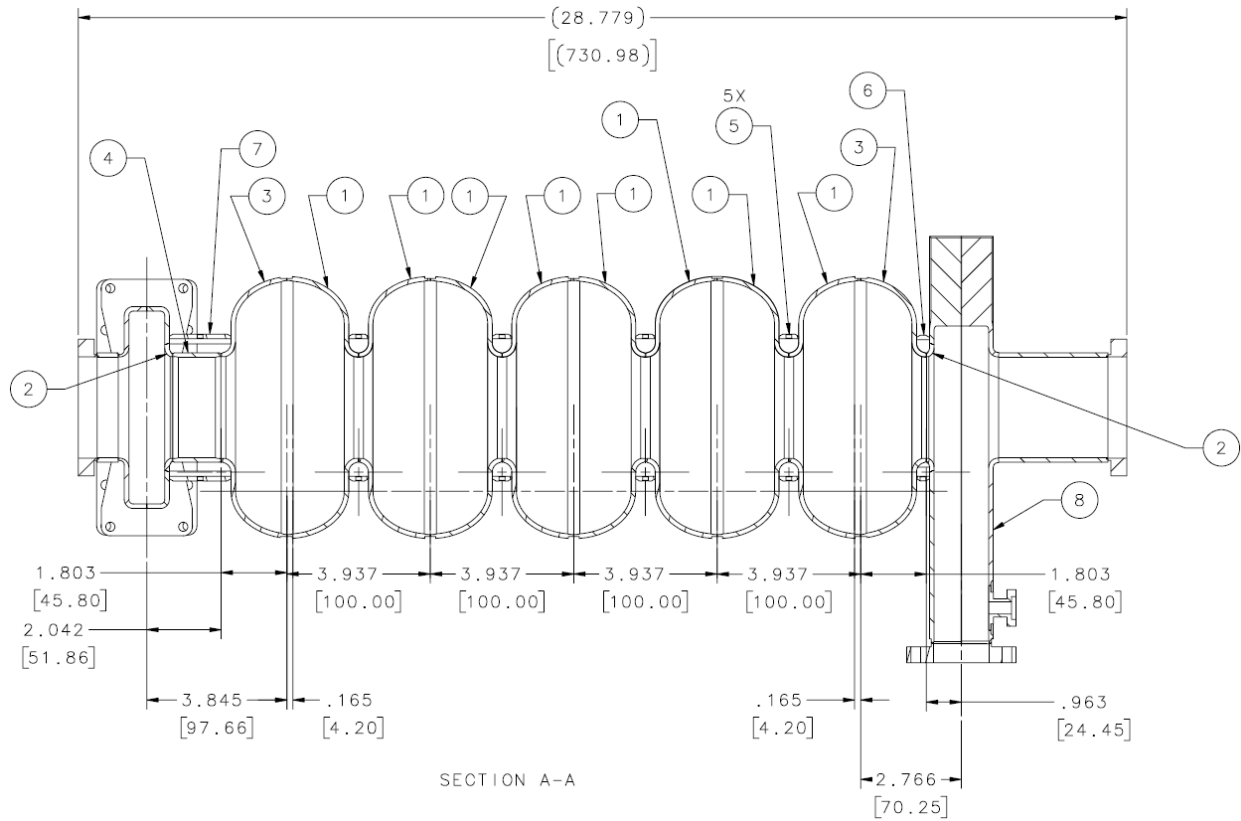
Drawing of the C75 cavity. Dimensions are in inches [mm].
